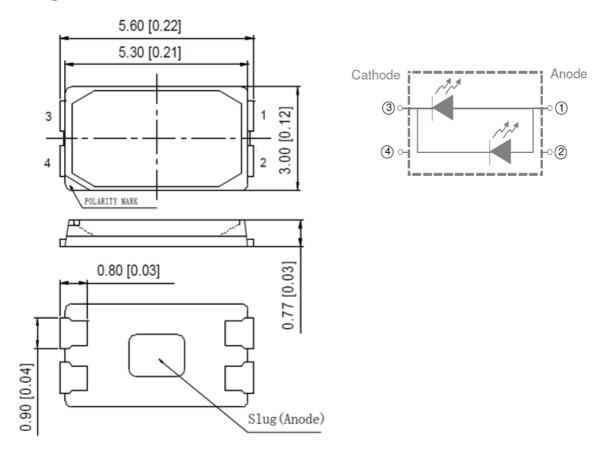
Mechanical drawings of the 5630 package, with unit in millimeter [in inches]
